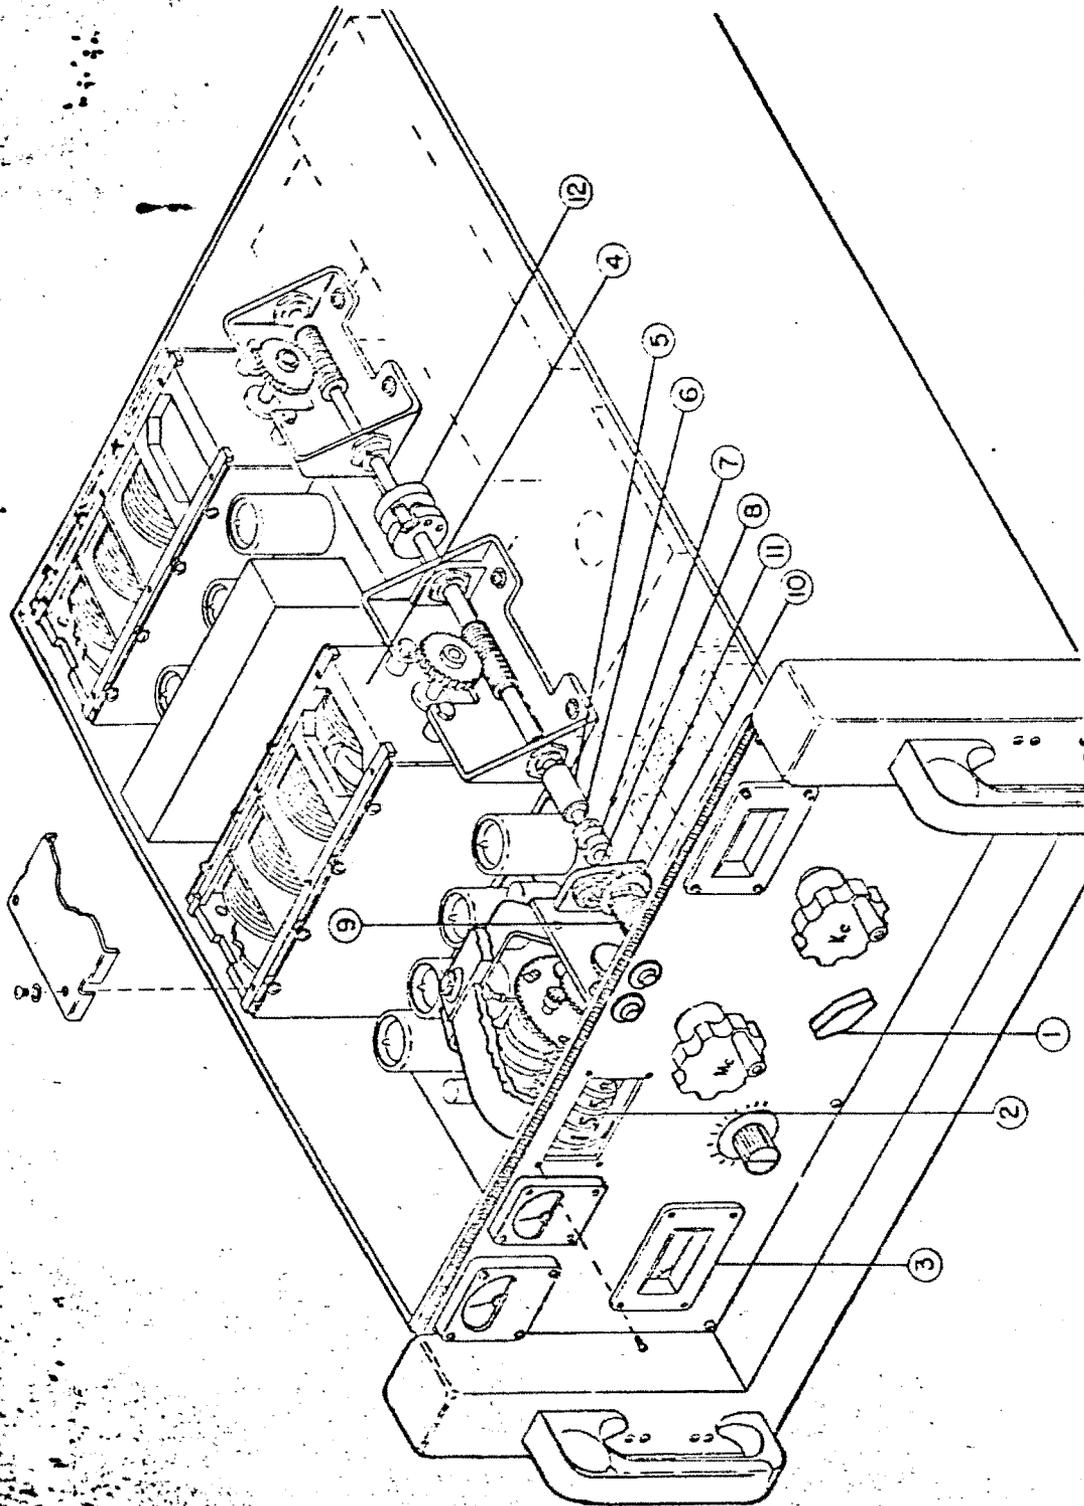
Countermeasures Receiver R-1125/FLR, Main Tuning Mechanism
